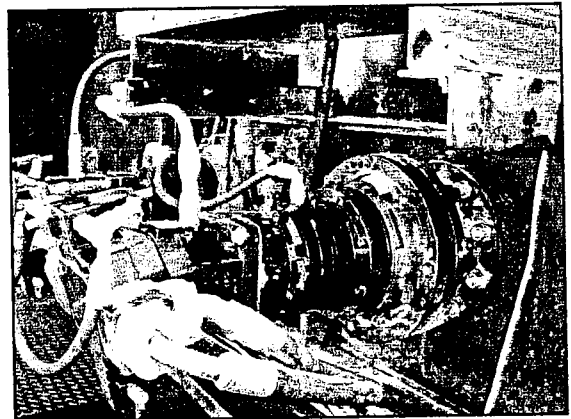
Showing intact threaded bolt hole in brake unit casing.
